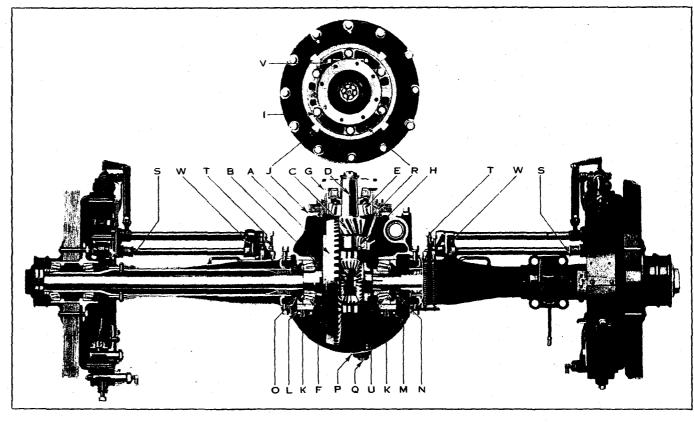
V-63 and Late Type 61 Rear Axle (roller bearing type)
